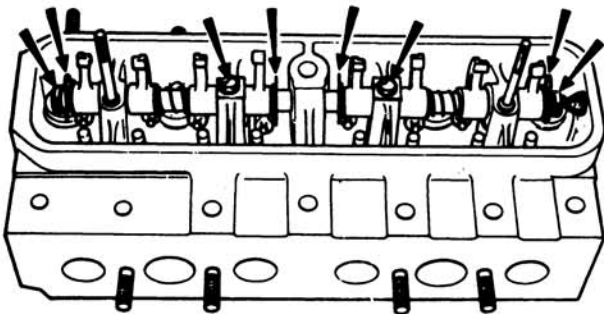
PRELIMINARY DISASSEMBLY OF ROCKER SHAFTS
